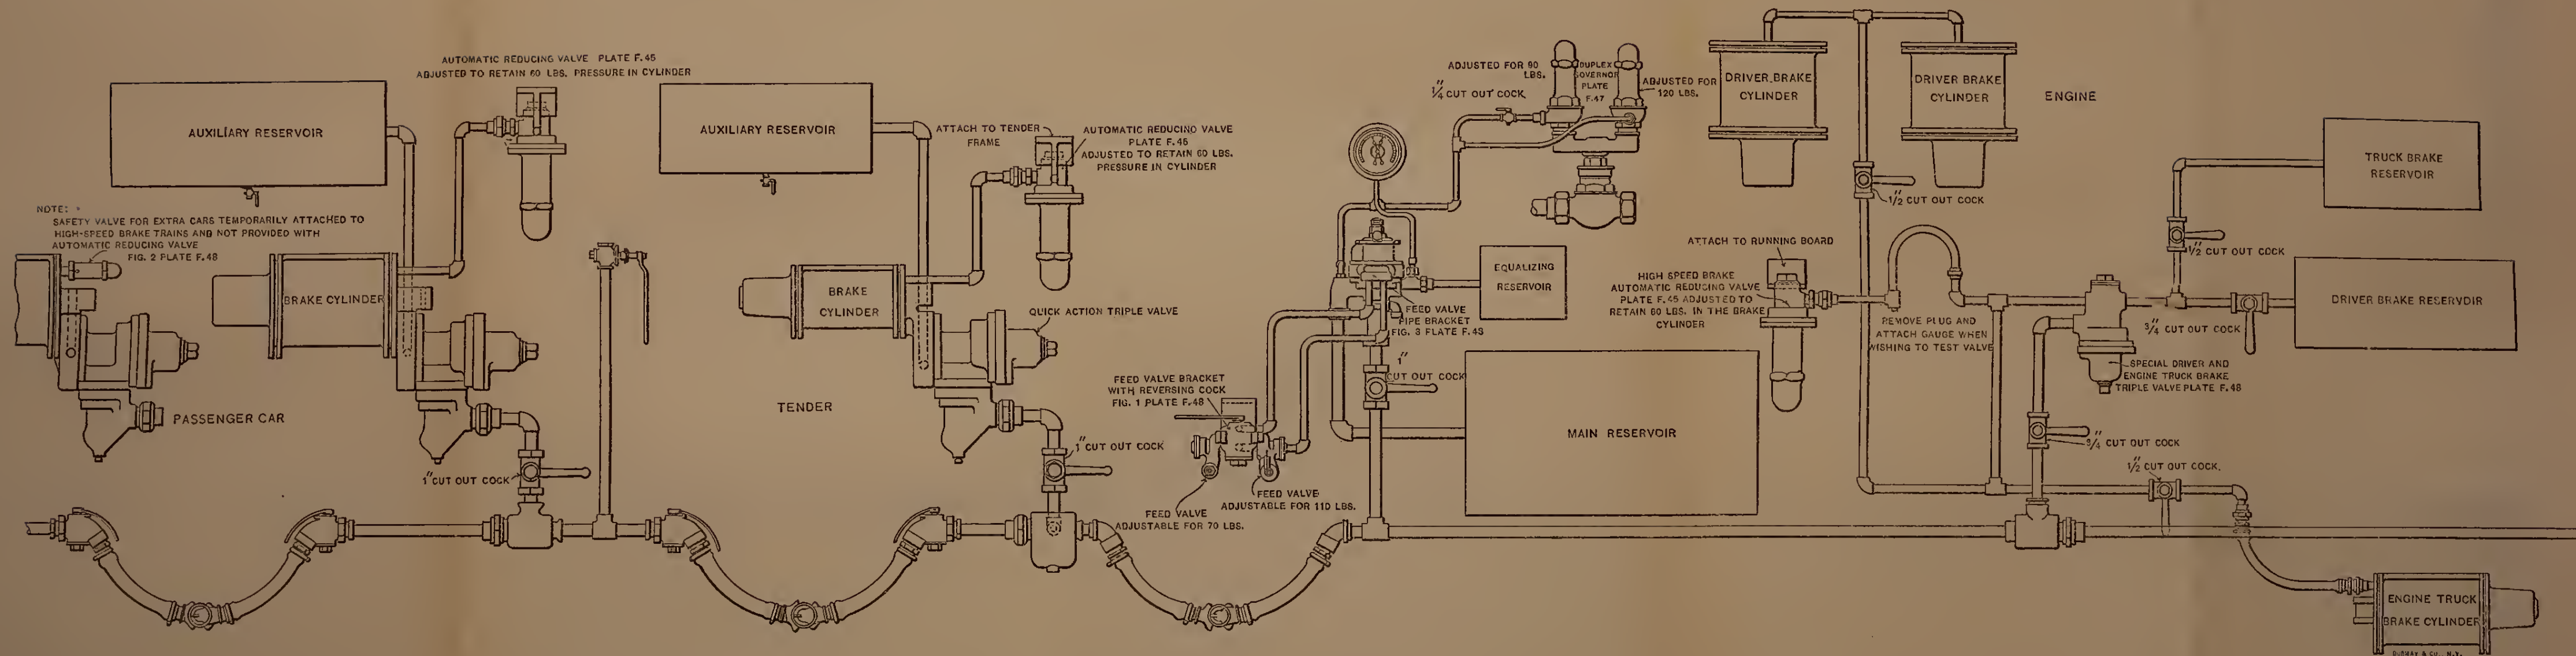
PLATE IX.—WESTINGHOUSE HIGH-SPEED BRAKE EQUIPMENT FOR ENGINE, TENDER, AND PASSENGER CAR.
